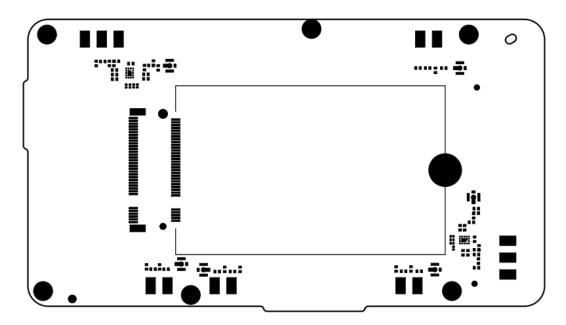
5G S-Module All-in-one Type-M Pin Layout top view
